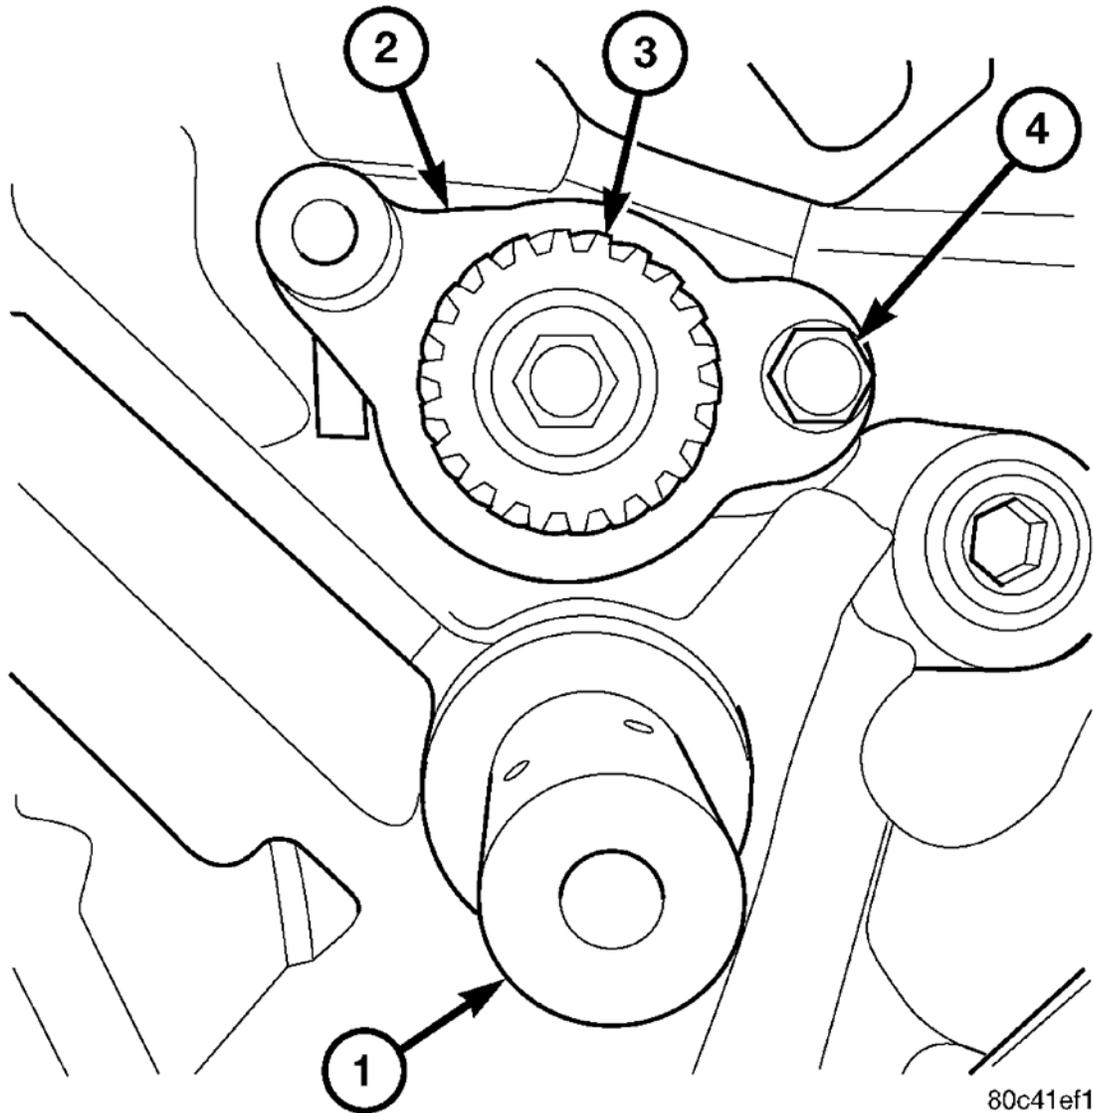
Idler Shaft, Counterbalance Shaft Thrust Plate, Counterbalance Shaft Drive Gear & Retaining Bolt
